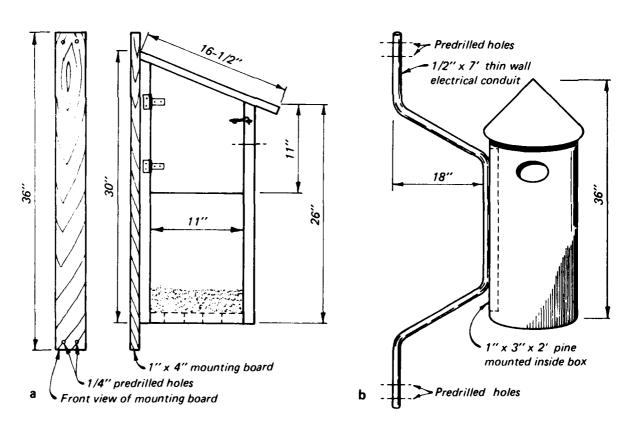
Construction details, side view, for a wooden nest box with board attached for mounting (a); and method for attaching a metal nest box using electrical conduit (b)
